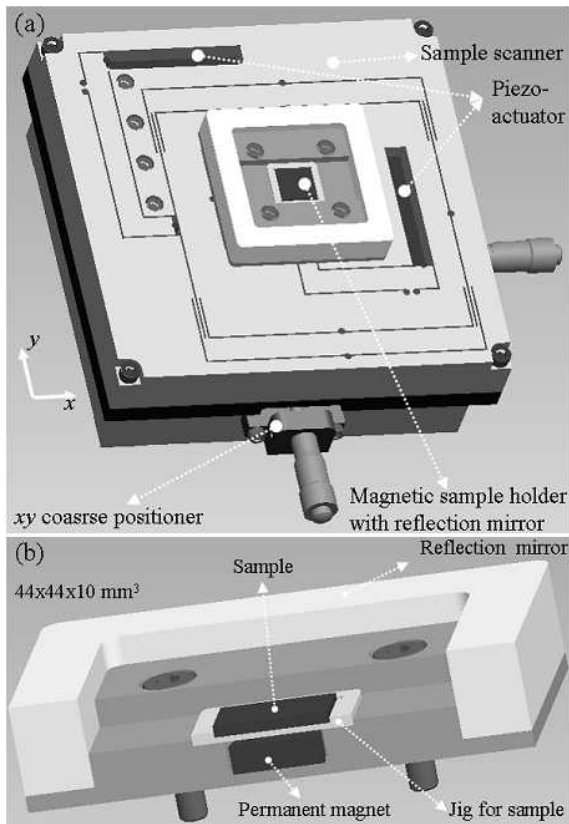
(a) Assembly drawing of the sample scanner which shows the magnetic sample holder, the sample scanner and the coarse xy positioner. (b) Sectional view of the magnetic sample holder which shows sample location, a reflection mirror, a jig for sample and a permanent magnet for fixing the sample.
